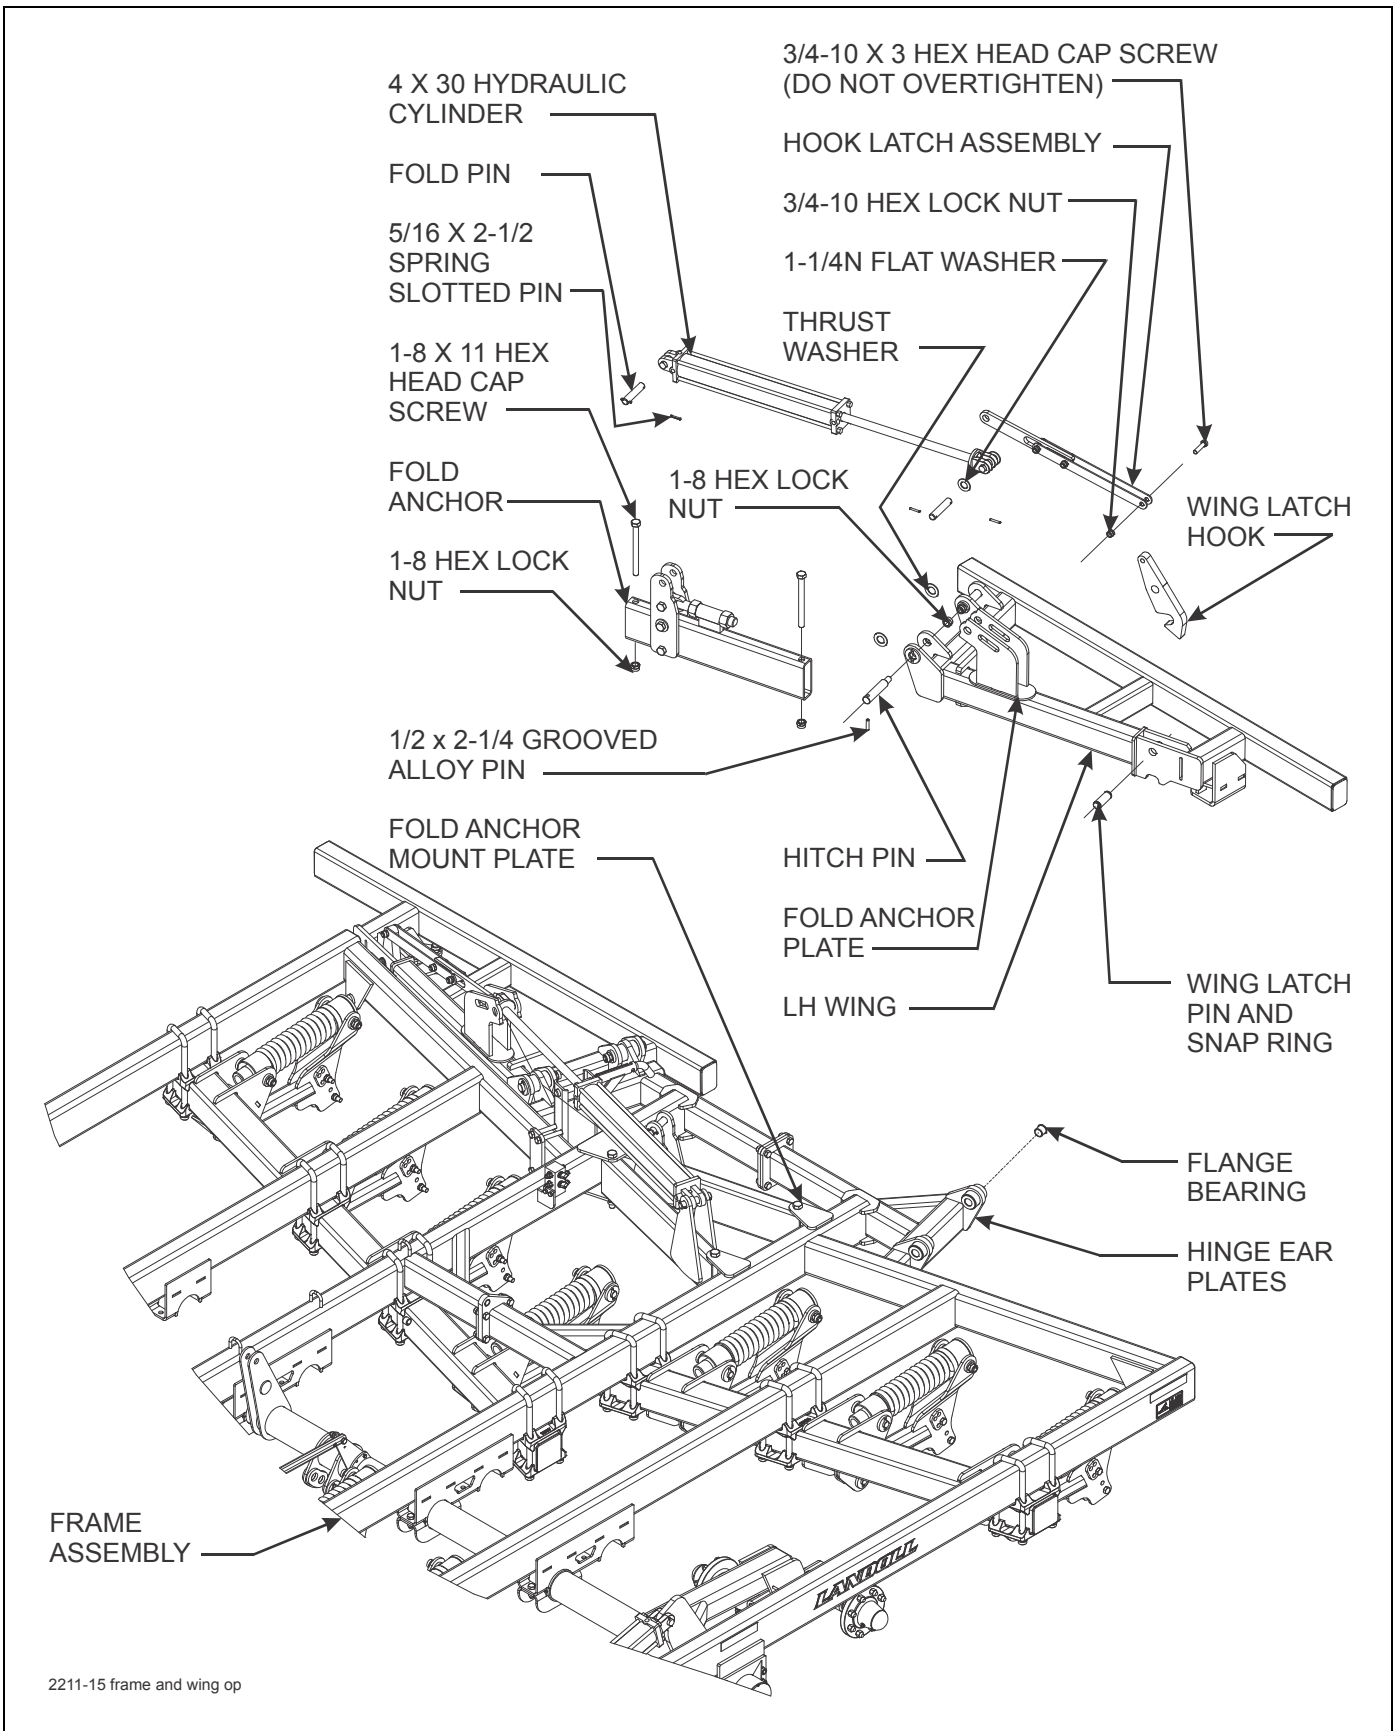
Wing Extension Installation (2211-13 & -15)
